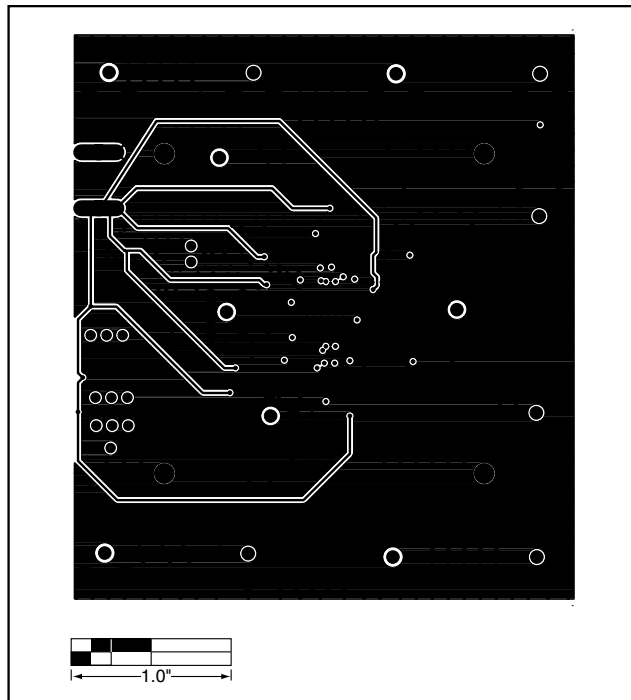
MAX2700/MAX2701 EV Kits PC Board Layout—Power Plane
